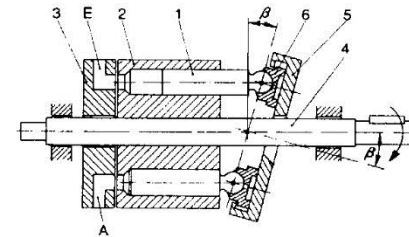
Axial piston pump of swash plate design with slippers (1) Piston (2) Cylinder-block (3) Valve plate (4) Drive shaft (5) Swash plate (6) Slippers. E inlet, A outlet.
